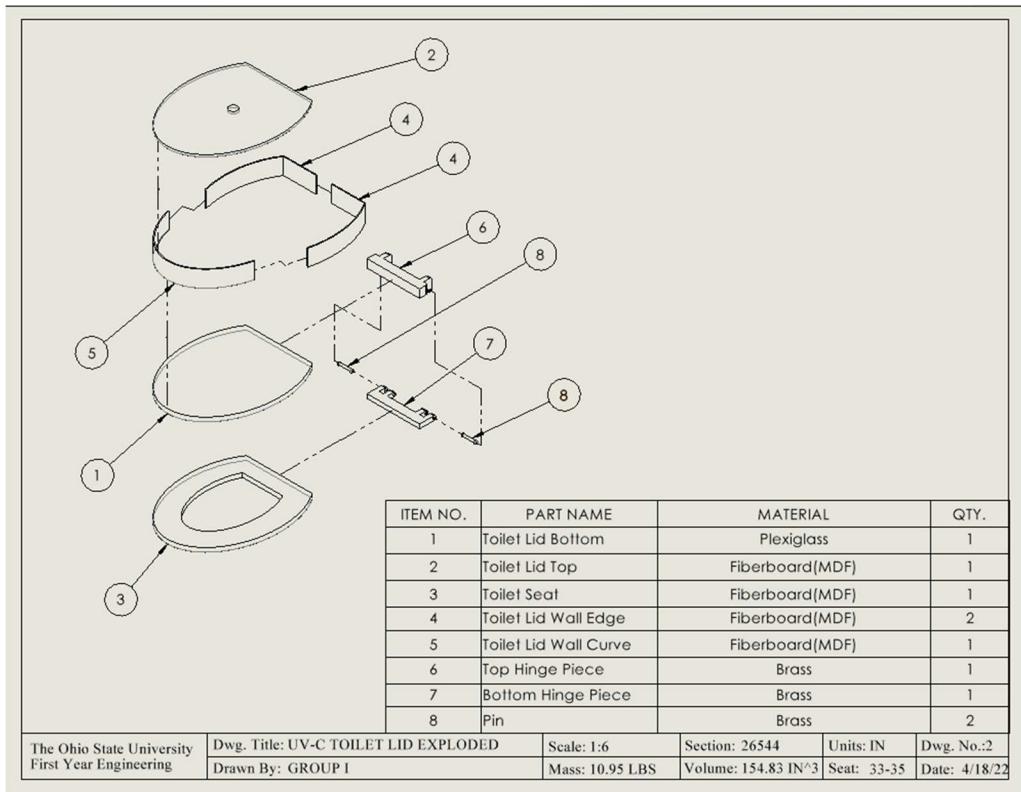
Drawing #2 that contains the exploded view of all the parts used within the entire prototype.
